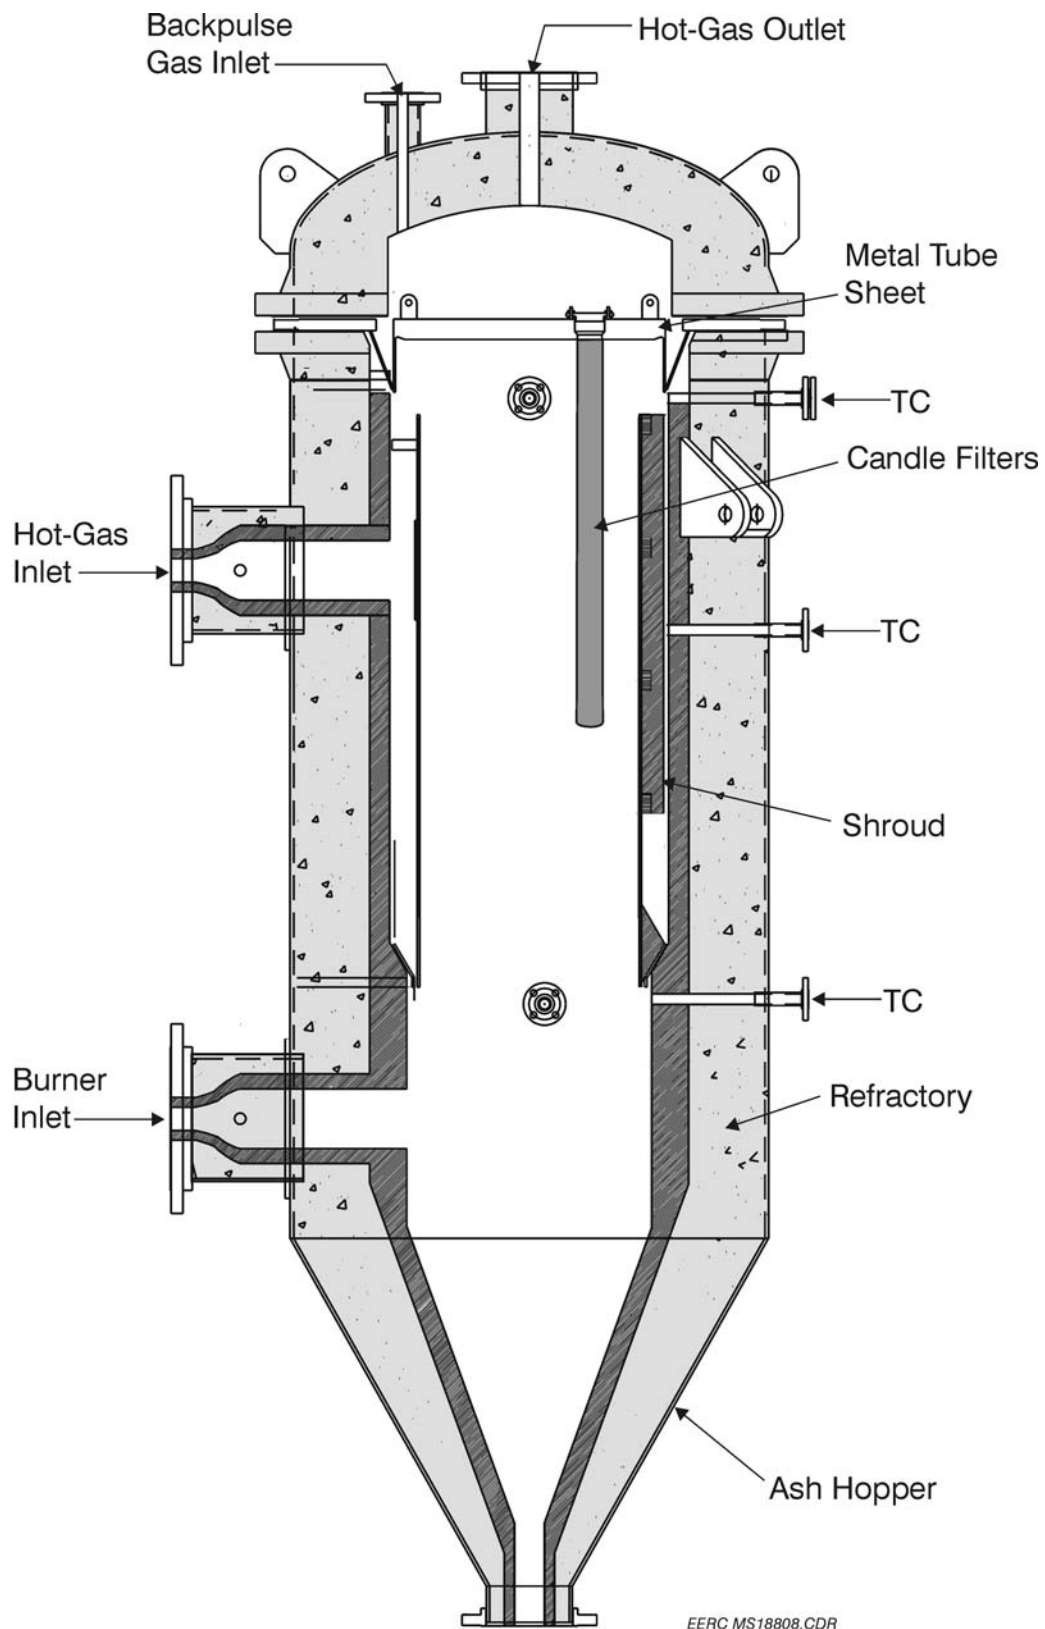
Schematic of filter vessel design with internal refractory, tube sheet, and shroud.
